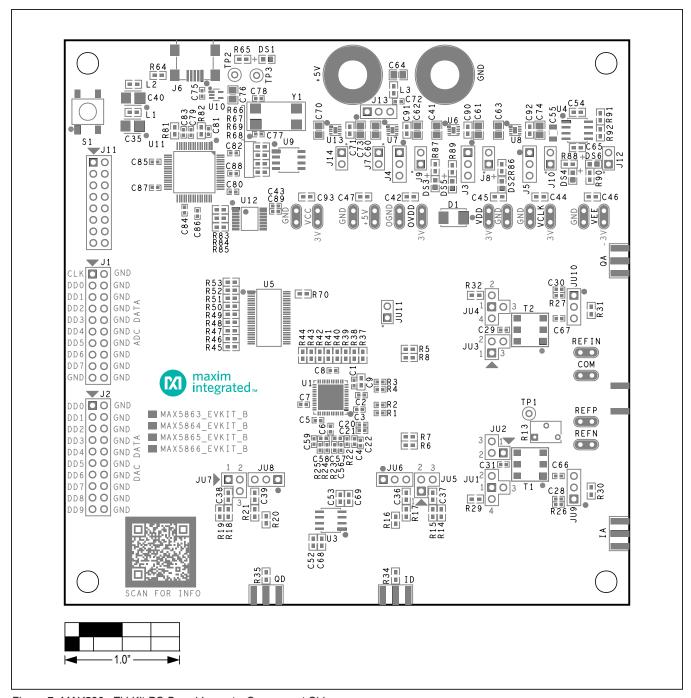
MAX586x EV Kit PC Board Layout—Component Side
